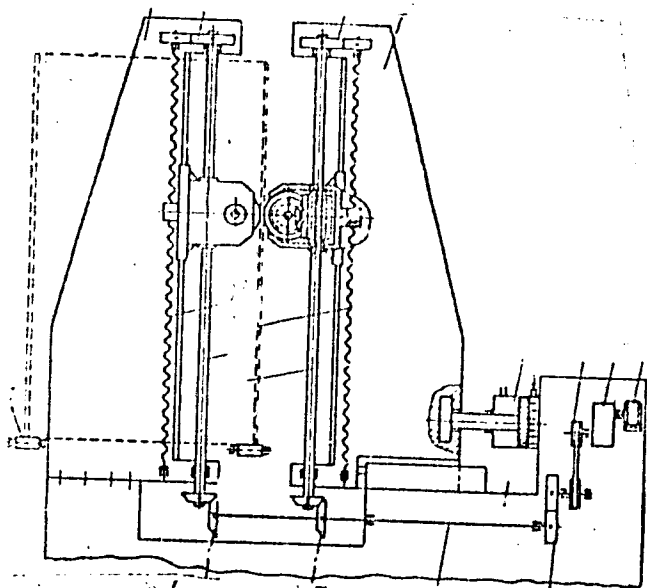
Schematic layout of a planisher for longitudinal welds in large-diameter shells.
